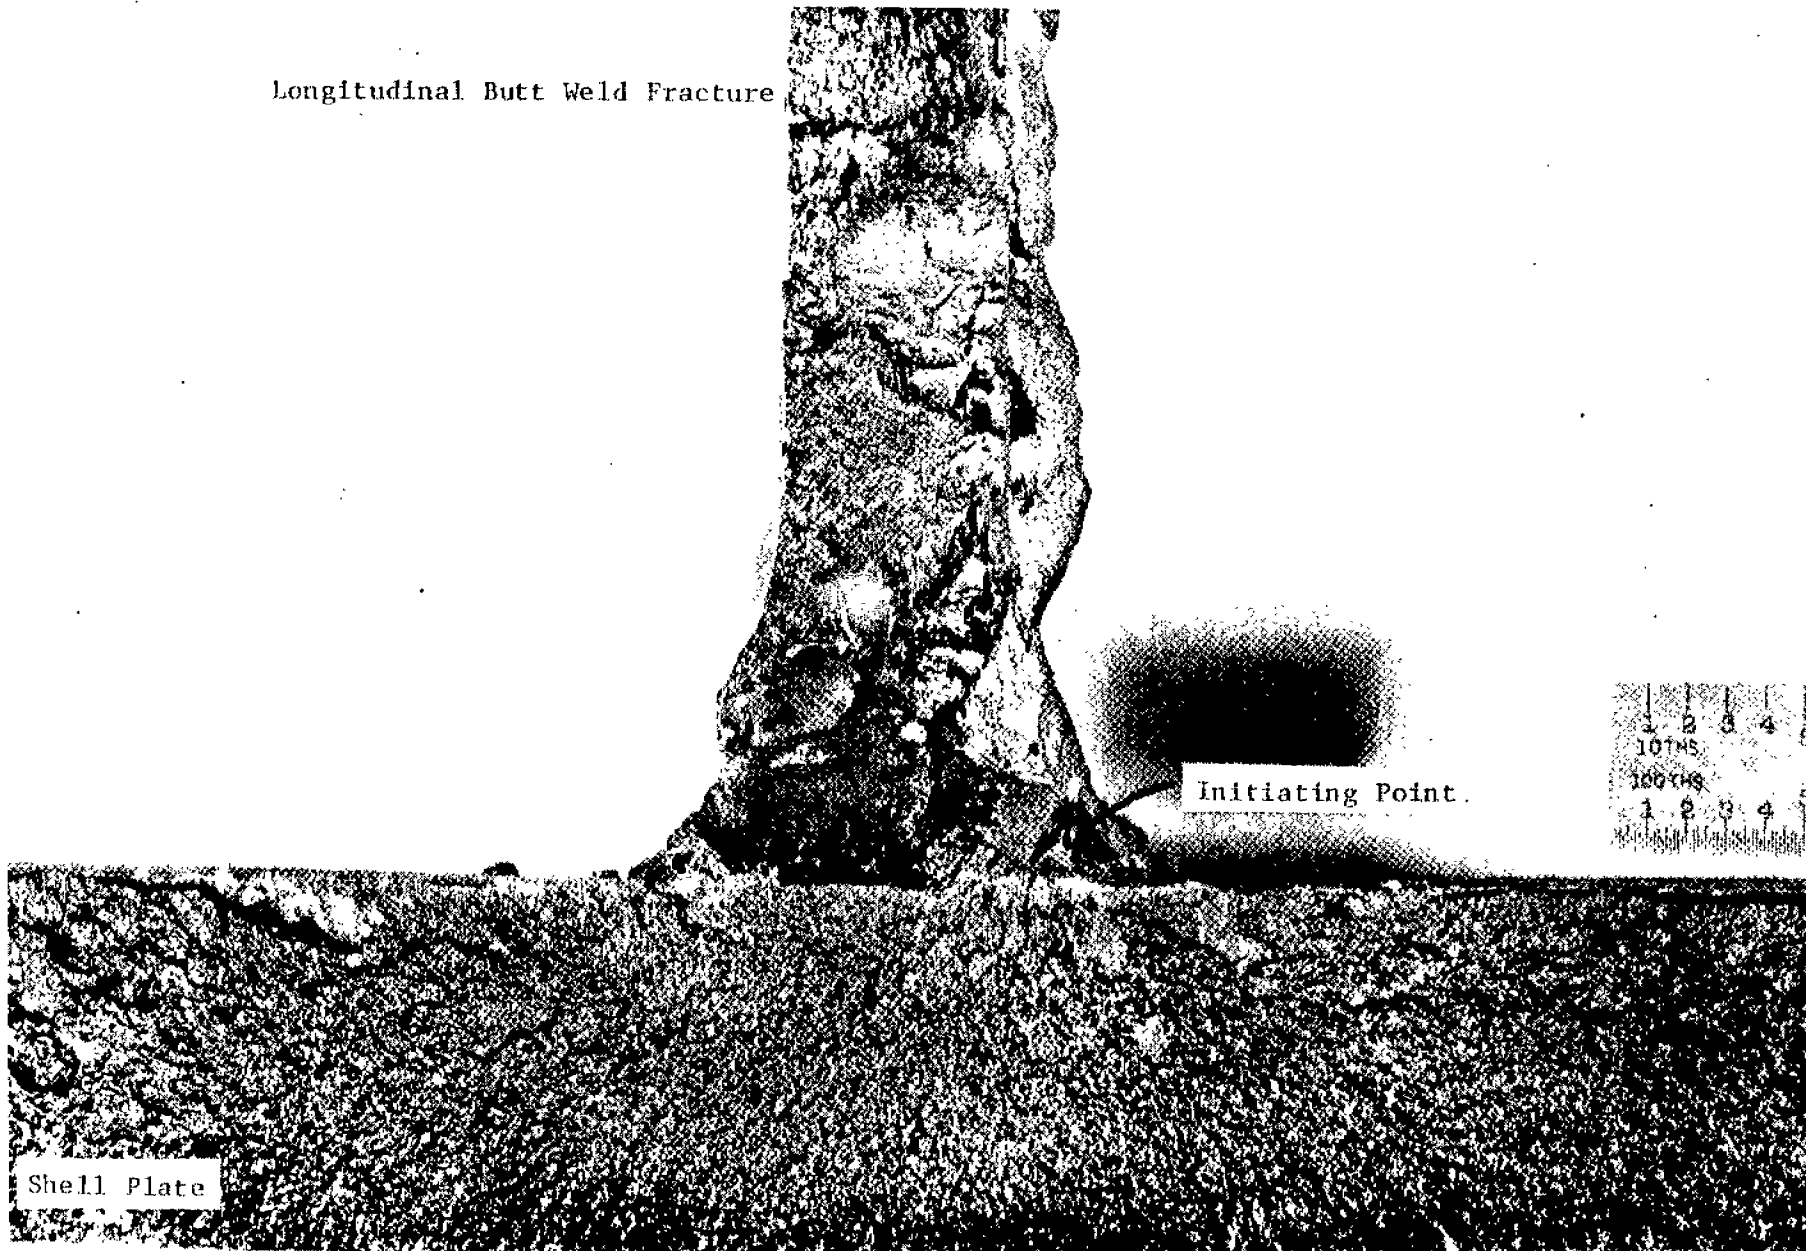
Initiating point of brittle fracture in fillet weld joining No. 5 longitudinal to the shell plate. Specimen No. 3908; Magn. 2x.
